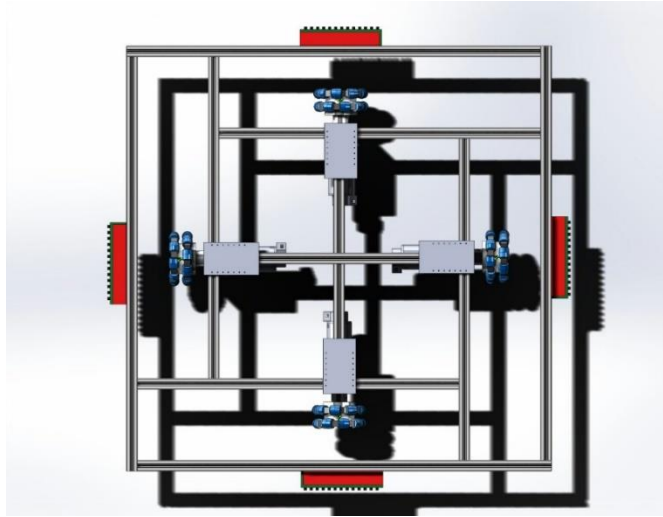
TOP VIEW OF BASE CAD OF DRIVE
